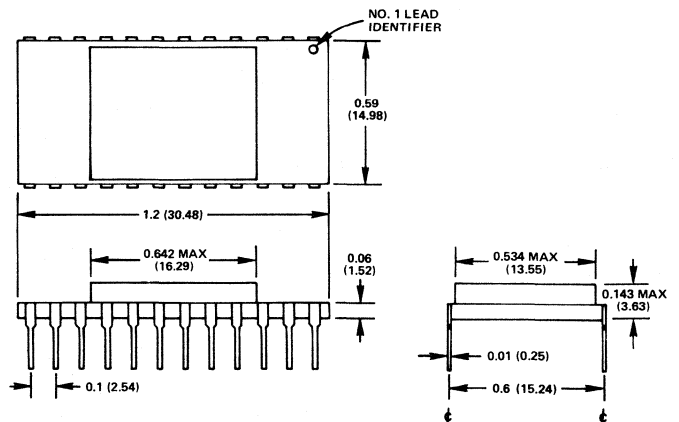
Outline Dimensions (Dimensions shown in inches and (mm))
